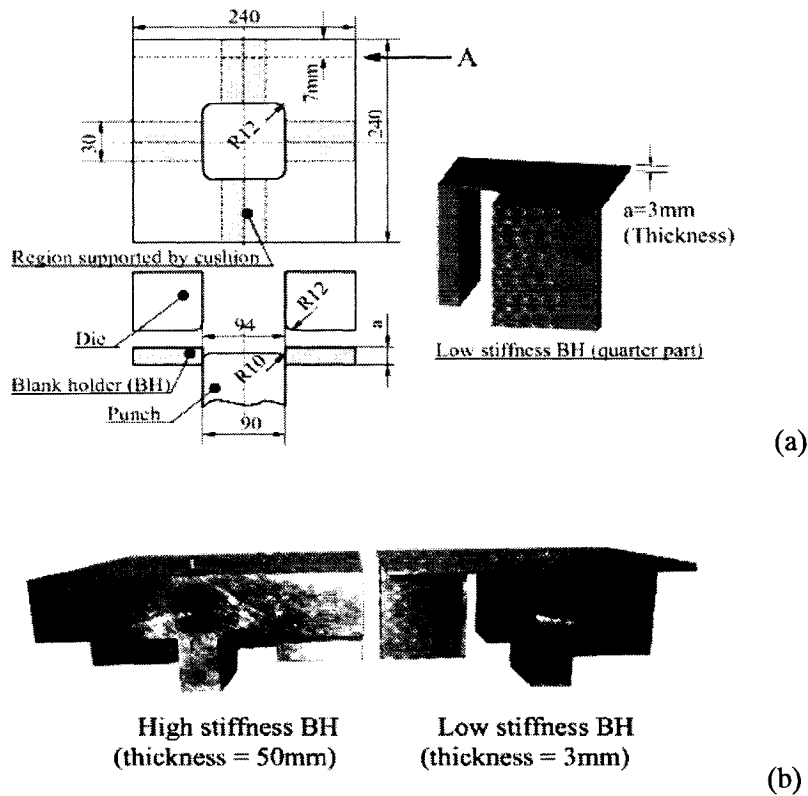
(a) Geometry of tools, and (b) Types of blank holders
